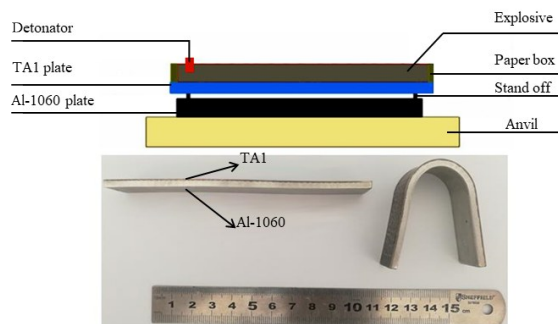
Experimental apparatus for explosive welding and Ti/Al composites
